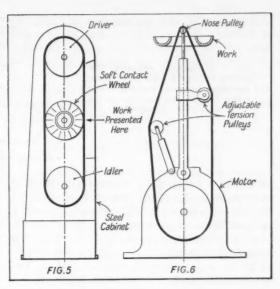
(Left) Schematic drawing of a contour grinding machine in which abrasive belt passes over a driving pulley and a tensioning pulley. Fig. 6. (Right) Yoke sander has a nose pulley made from a standard 7/8-inch bearing.
